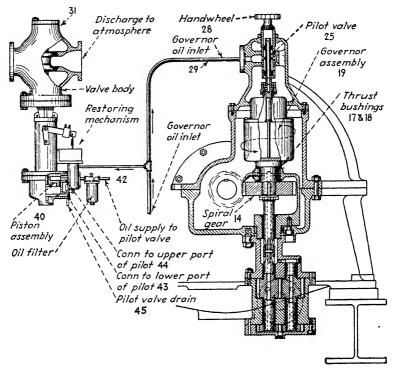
Overspeed protective governor regulates compressor by-pass to atmosphere to control turbine speed. (*Courtesy of Allis-Chalmers Manufacturing Co.*)
